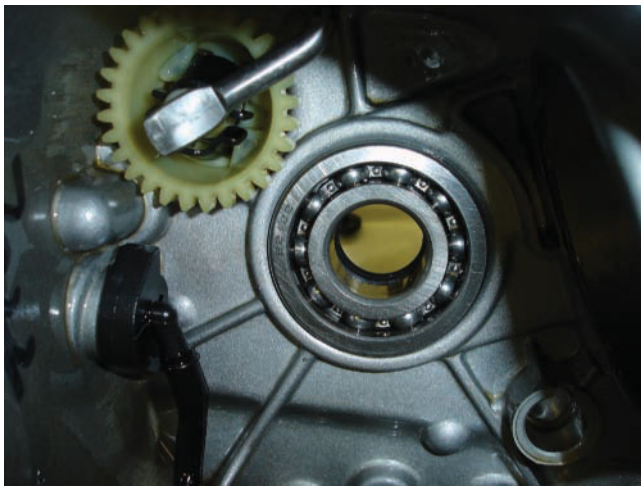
Ball bearings are found commonly in power equipment engines.
